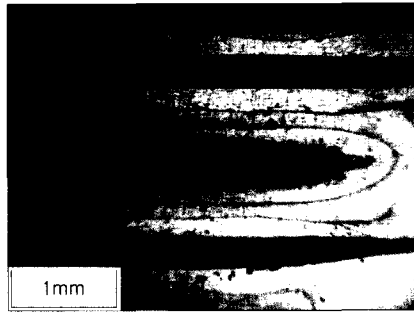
Weld cross section for Experiment 1-4(S)
